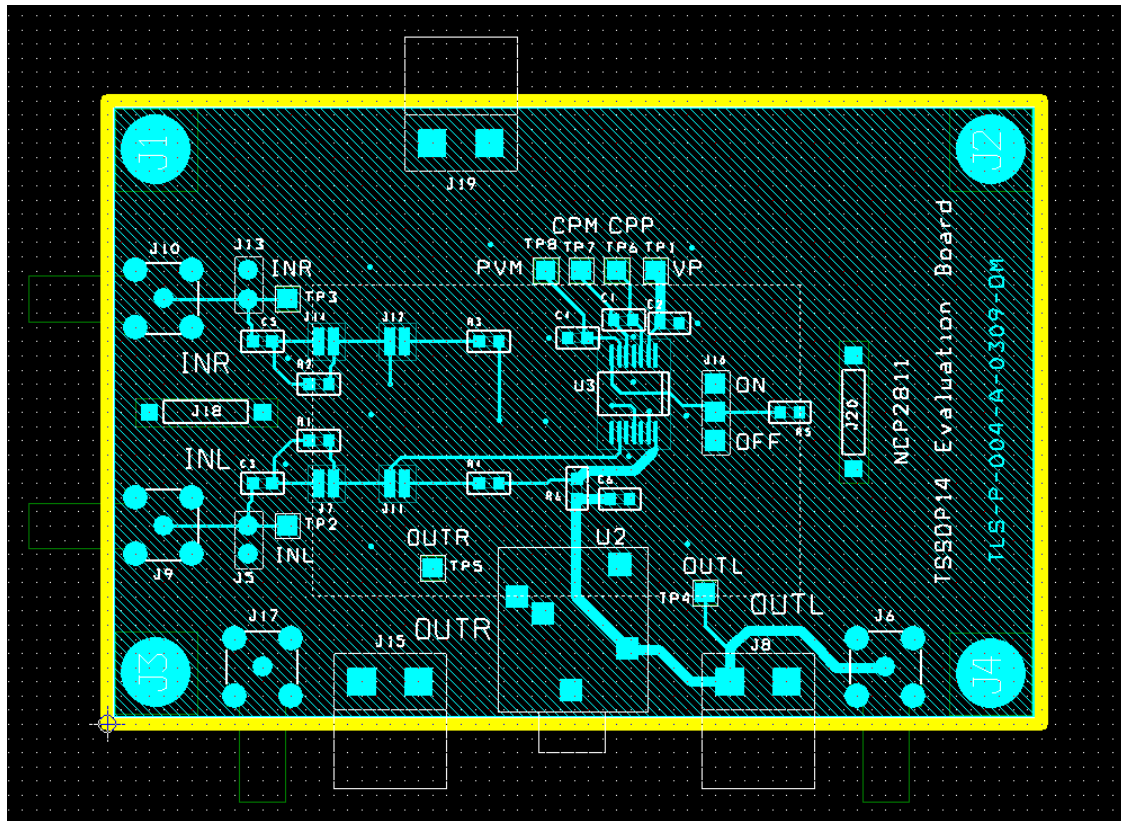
NCP2811ADTBGEVB Board Layout (Top View)
